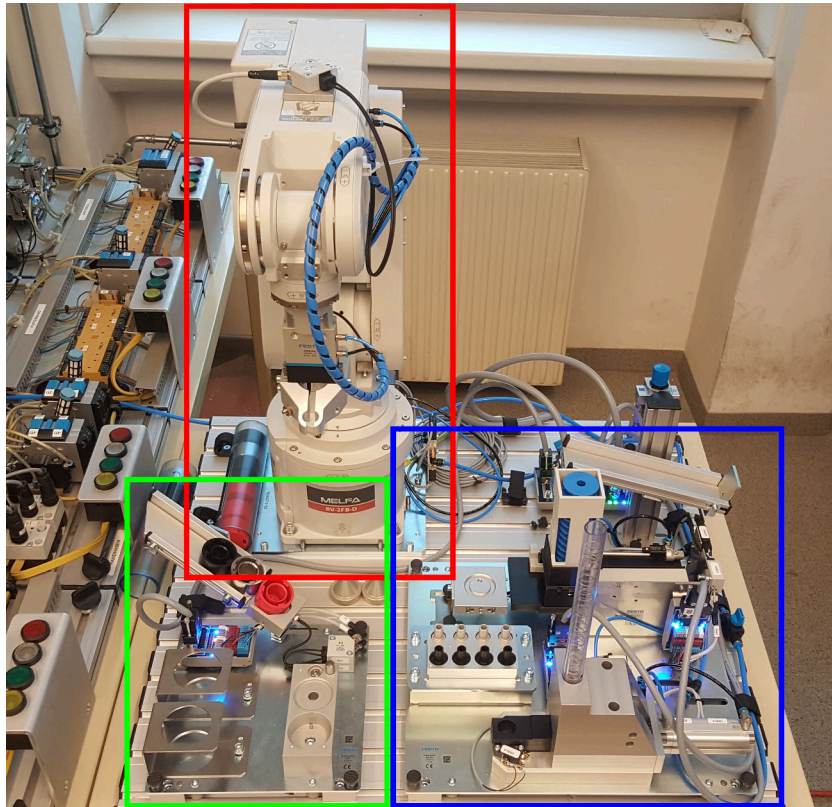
Mitsubishi robot, Robot handling module, Robot assembly module
